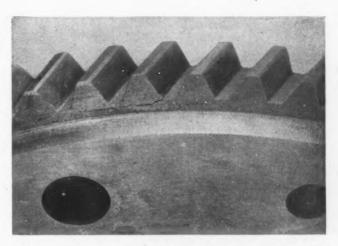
Above—Example of failure of gear tooth by cracking at fillet. Magnetic examination revealed cracks on several other teeth on the same wheel
